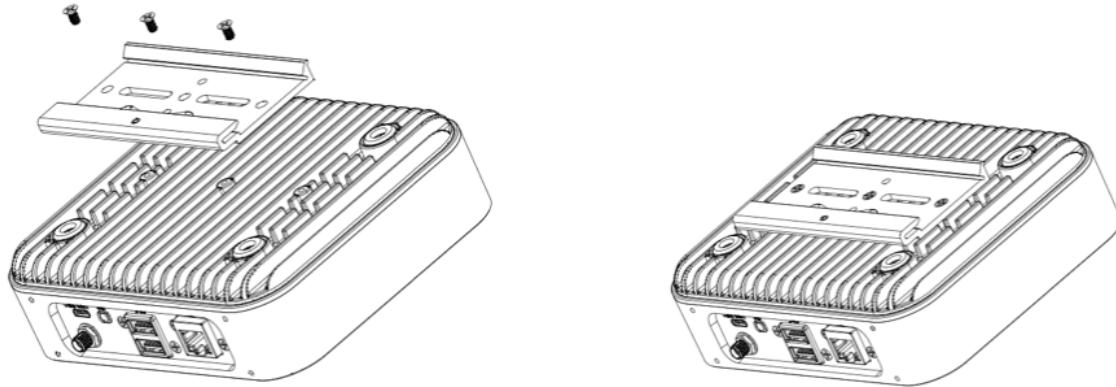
How to Assemble DIN Rail Bracket to Edge Hub
